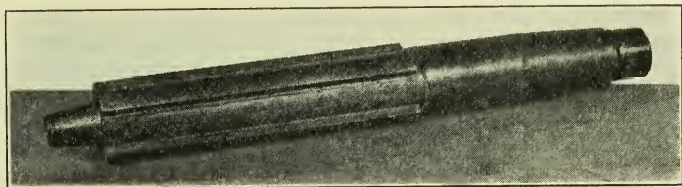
A TYPICAL SPLINE SHAFT SHOWING HOW THE BODY OF THE SHAFT IS LARGER IN DIAMETER THAN THE PORTION BETWEEN THE SPLINES
